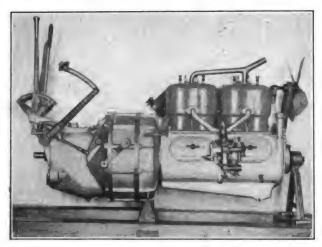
Method of Connecting Gardner Starter and Its Relation to Engine and Other Parts.
